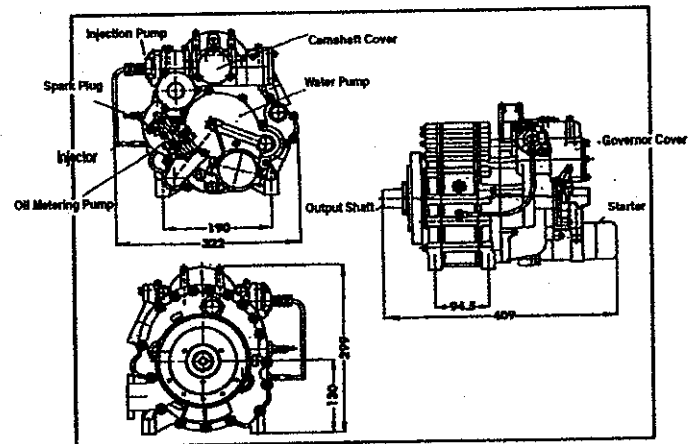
LCCR 400 SD single rotor engine, layout and dimensions
